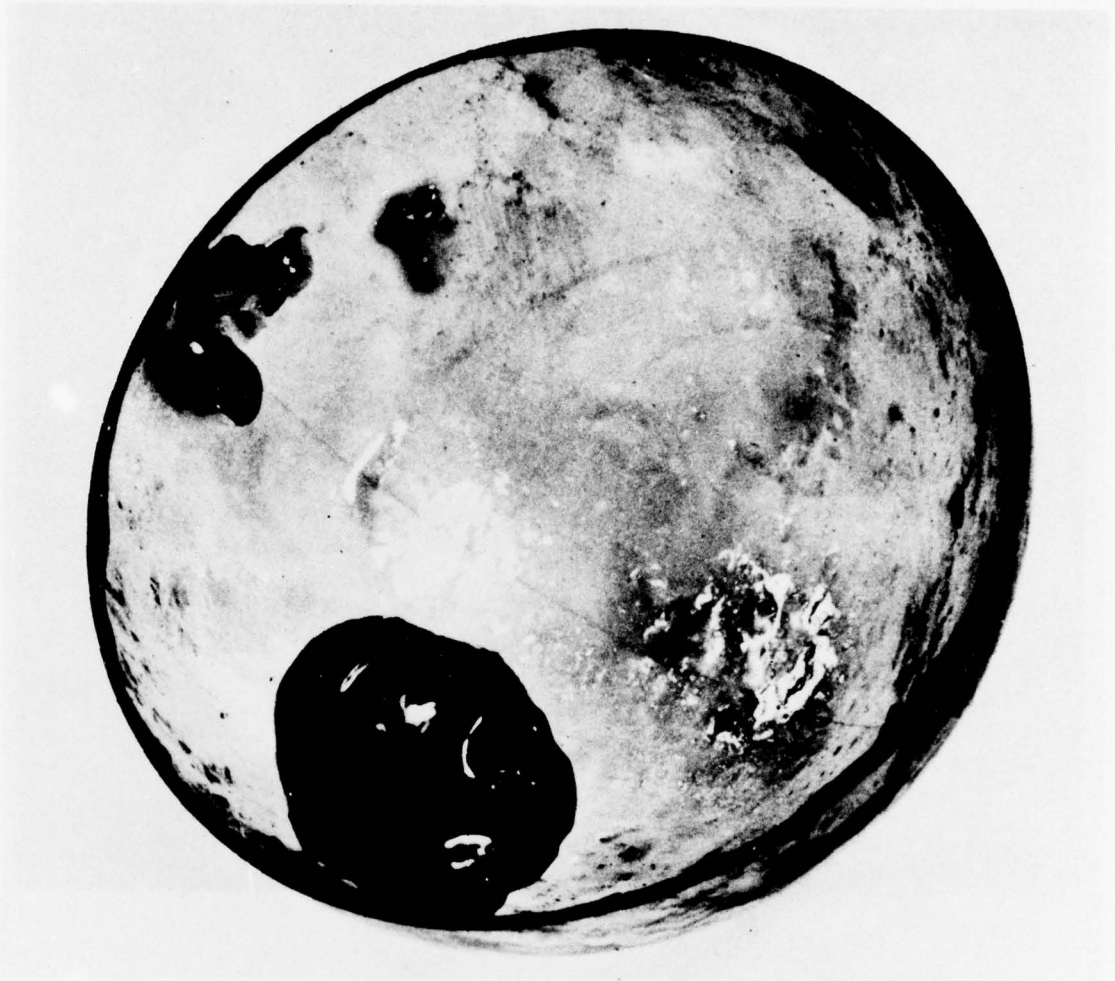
Resin gel too quick causing snow ball effect on inner surface
